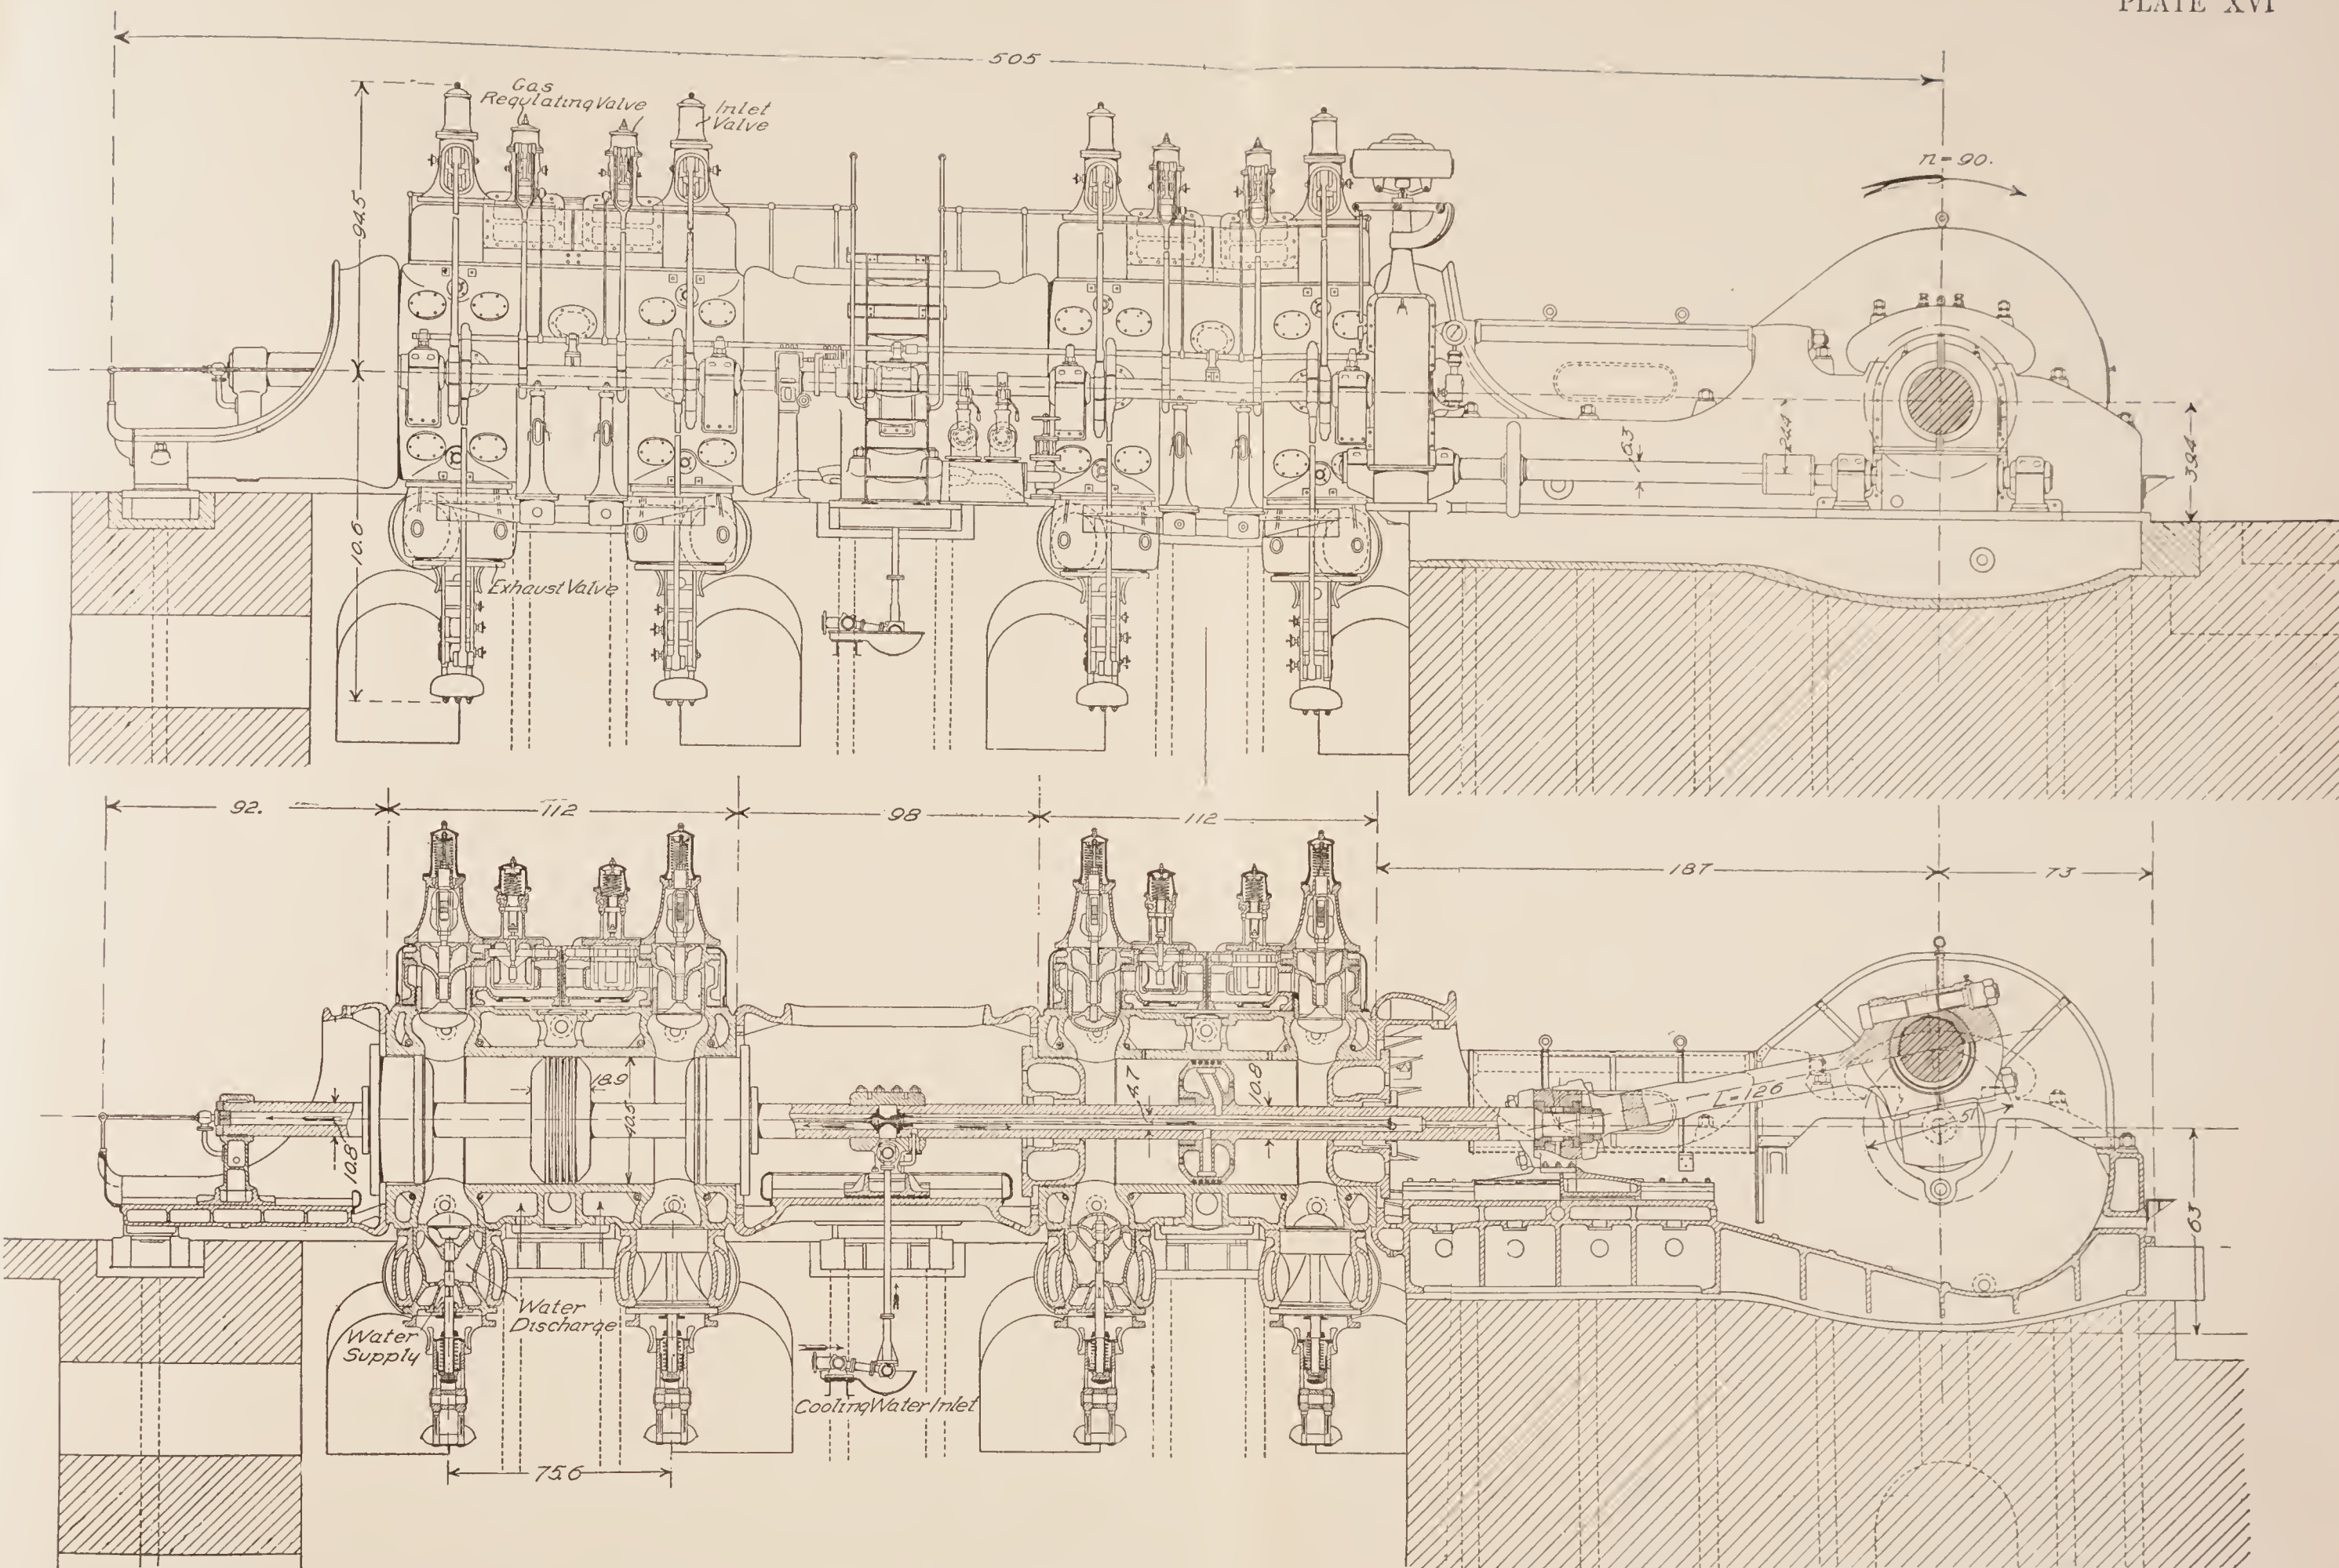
Tandem Producer Gas Engine, older Type, Maschinenbau-Ges. Nürnberg.
